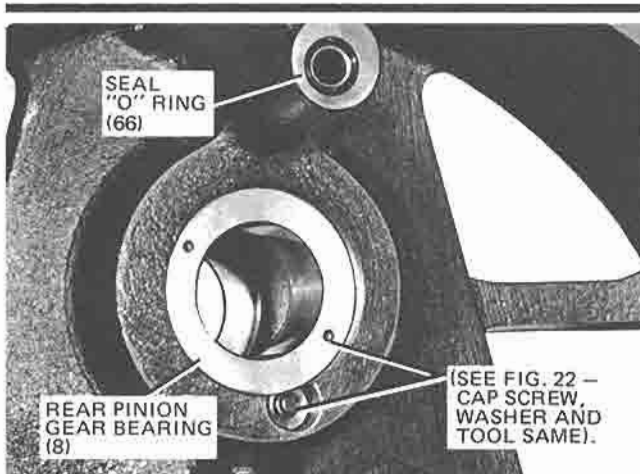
REMOVING REAR PINION GEAR MAIN BEARING
